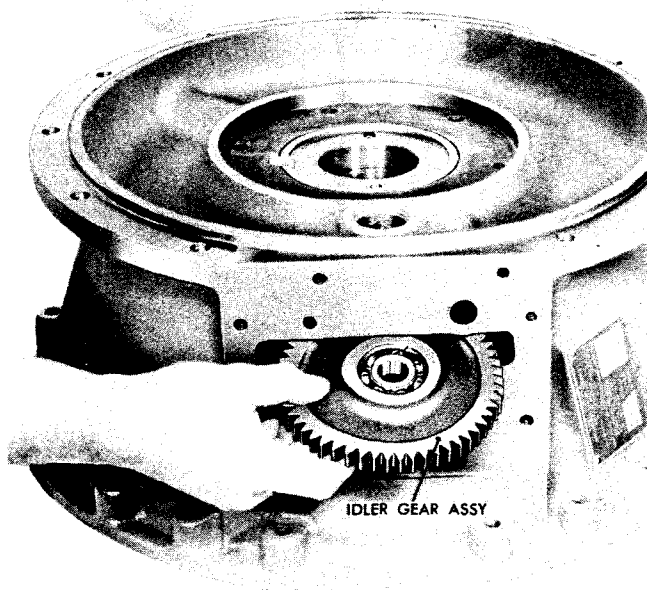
Removing (or installing) oil-pump idler gear assembly
